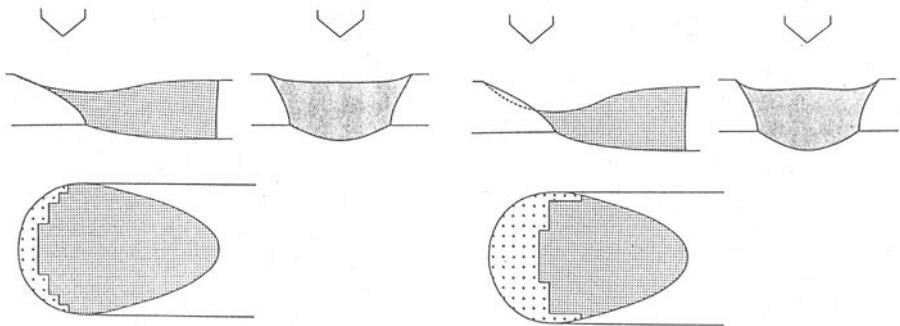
Relation between bead surface profile and weld cross section in flat position (Model I ,  $H=3\text{mm}$ )
